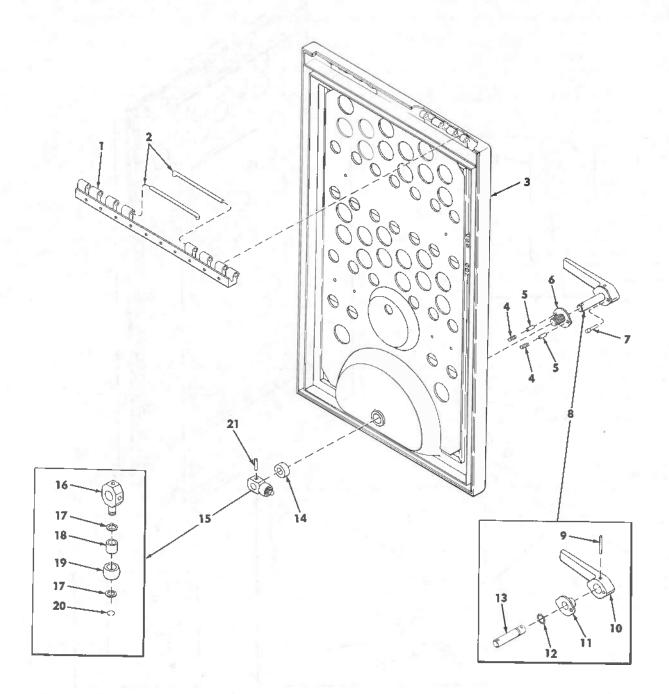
DOOR /8018666/-PARTIAL EXPLODED VIEW /SEE FIGURE 235 FOR NEXT HIGHER ASSEMBLY/
